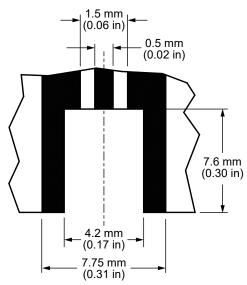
Recommended PCB Dimensions for the CONSMP024-G
